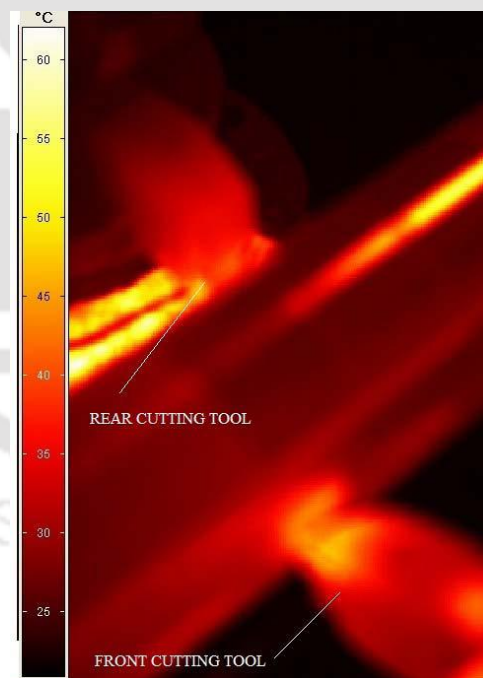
Thermographic image while machining grey cast iron with coated carbide front and rear cutting tool (75 m/min cutting speed, 0.08 mm/rev feed, 1 mm depth of cut and 2 mm distance between cutting tools)
